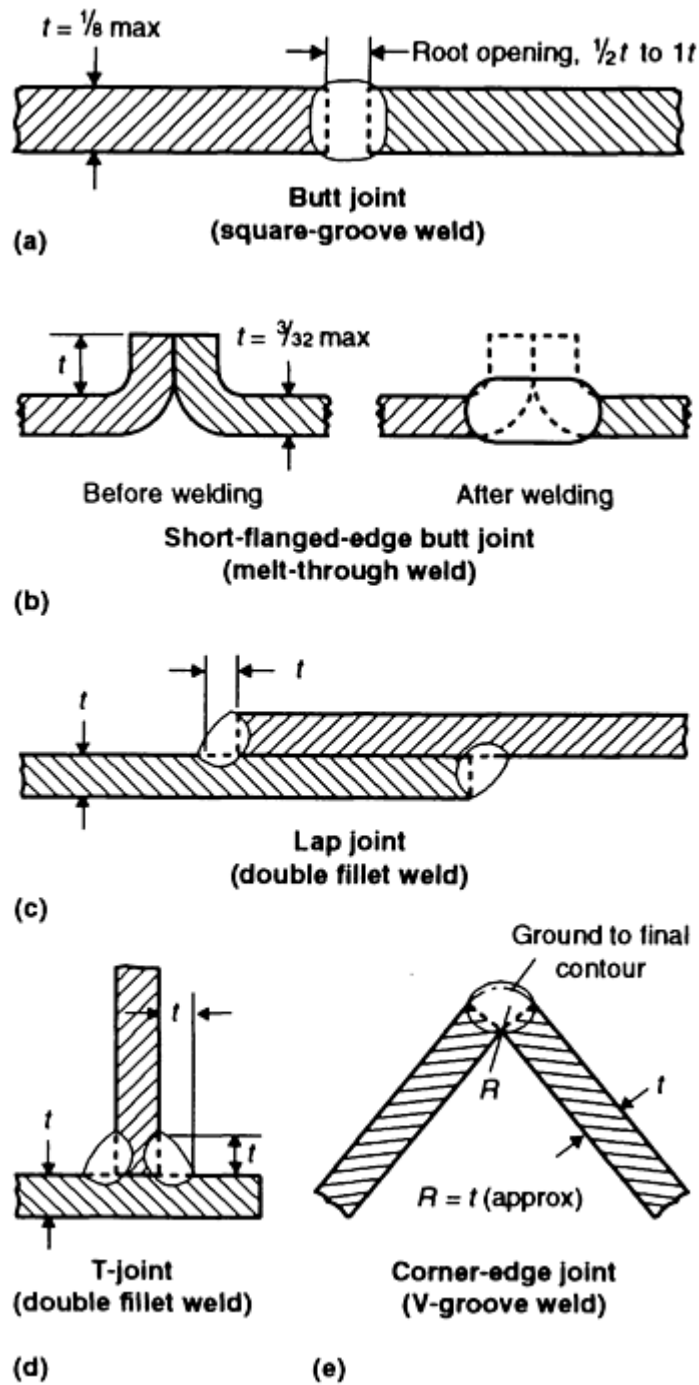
TYPES OF JOINTS AND RESULTING SINGLE-PASS WELDS OBTAINED WITH OXYFUEL GAS WELDING OF THIN SHEET MATERIAL. MEASUREMENTS IN INCHES
